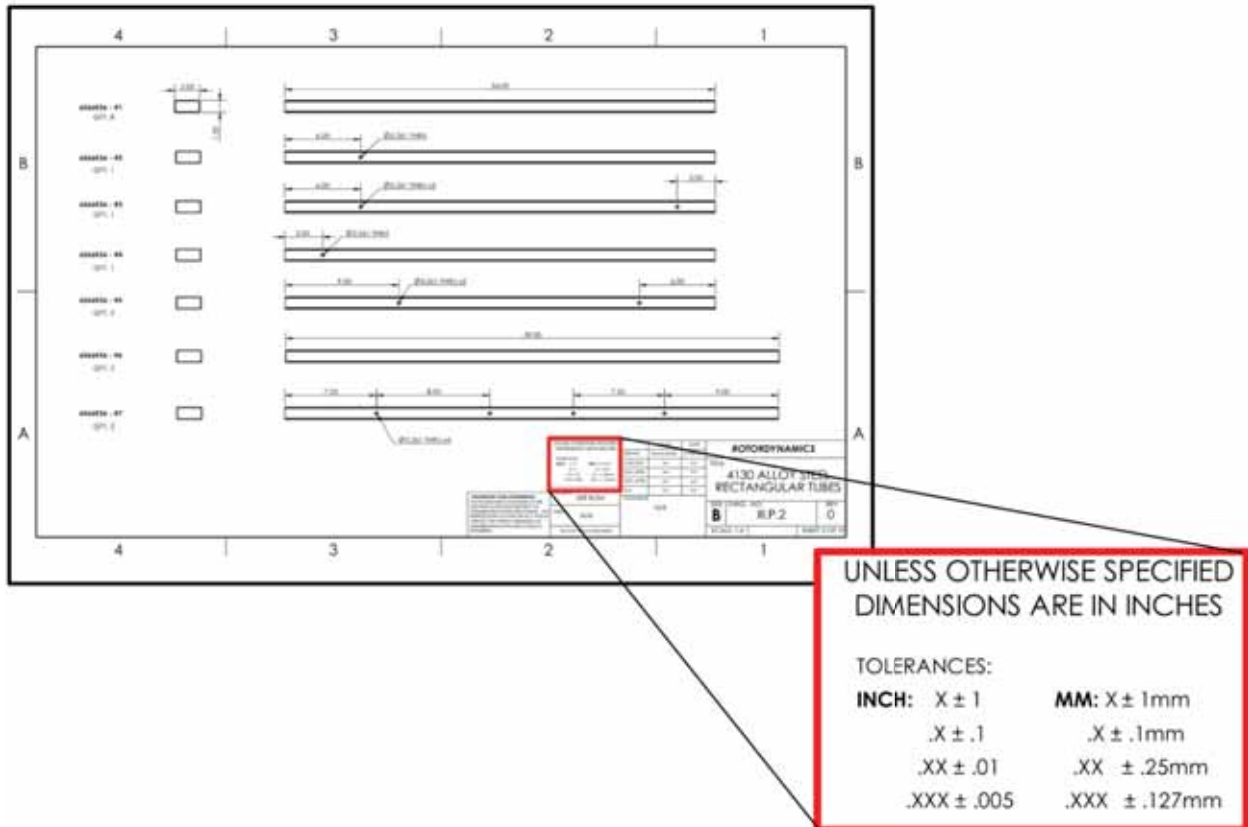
Example Manufacturing Drawing with tolerances
